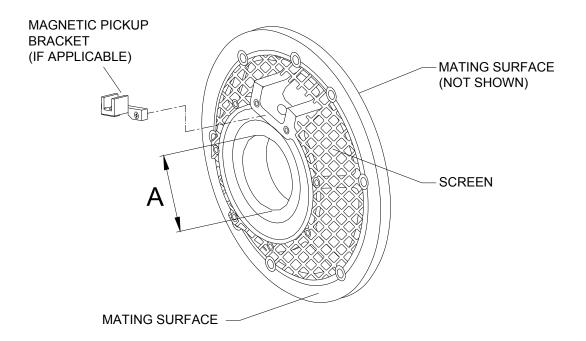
Inspecting Drive End Bearing Support Assembly
